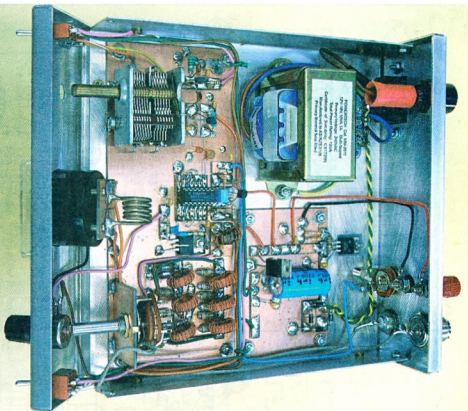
Circuit board layouts (front panel lowered for clarity).
